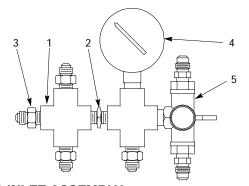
CO₂ CHANGEOVER INLET ASSEMBLY
